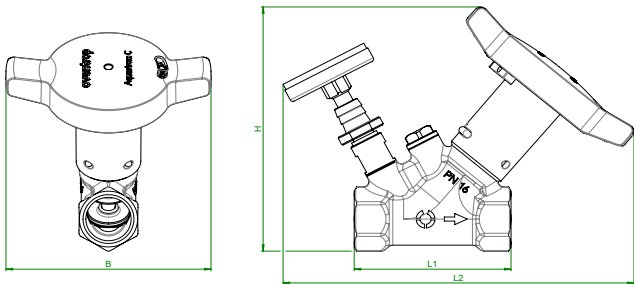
Dimension side view / front view - version with internal thread without accessories
